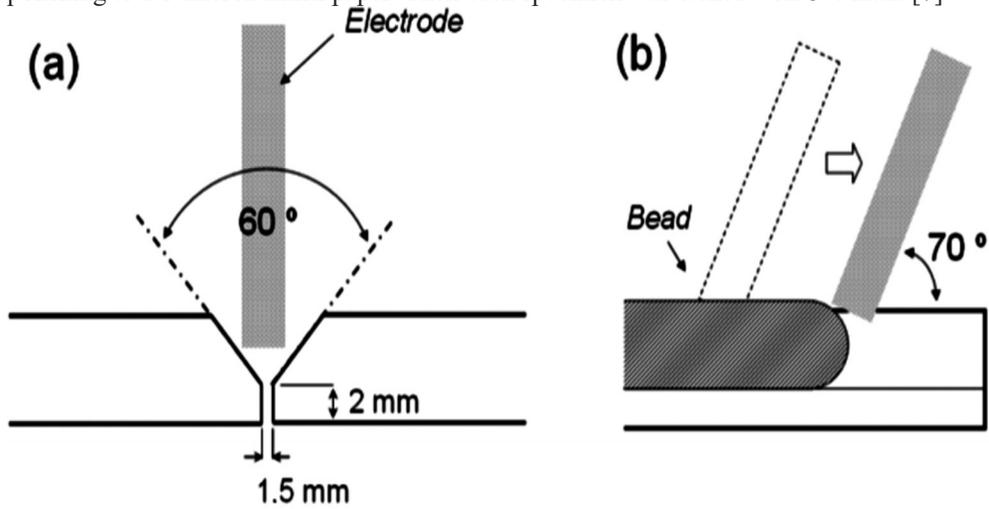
Schematic representation of the welding process used for the ADI blocks when using Ni-Cr-Cu alloys as electrodes [7].
